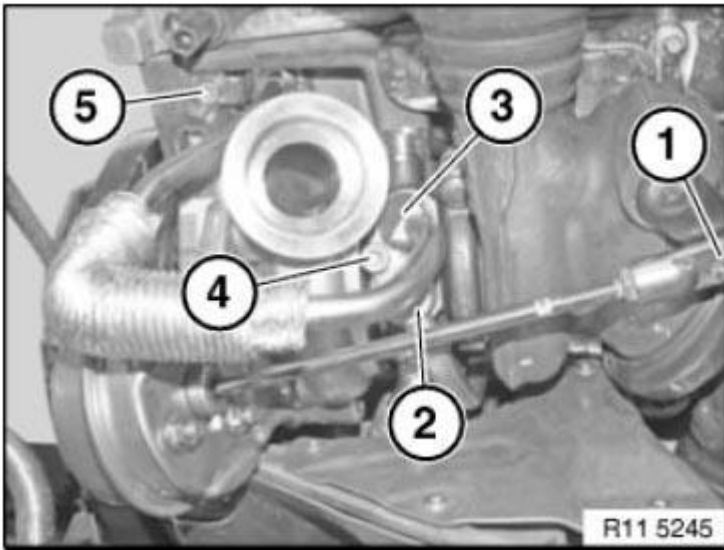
Identifying Snap Ring, Coolant Return Line And Screws
